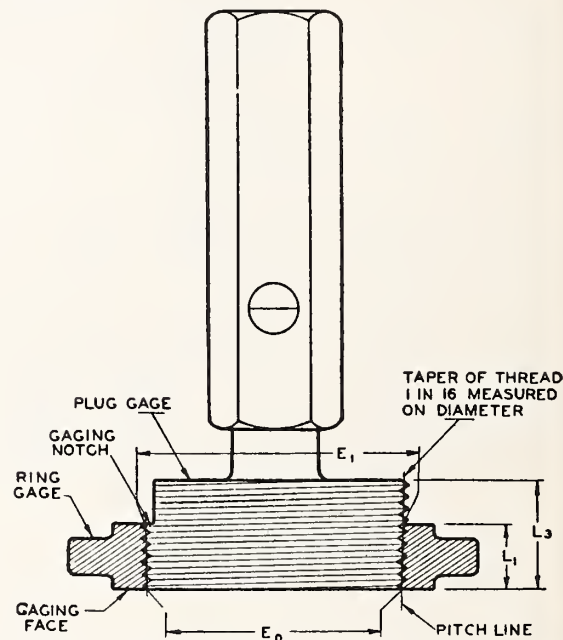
Standard taper pipe thread plug and ring gages.
